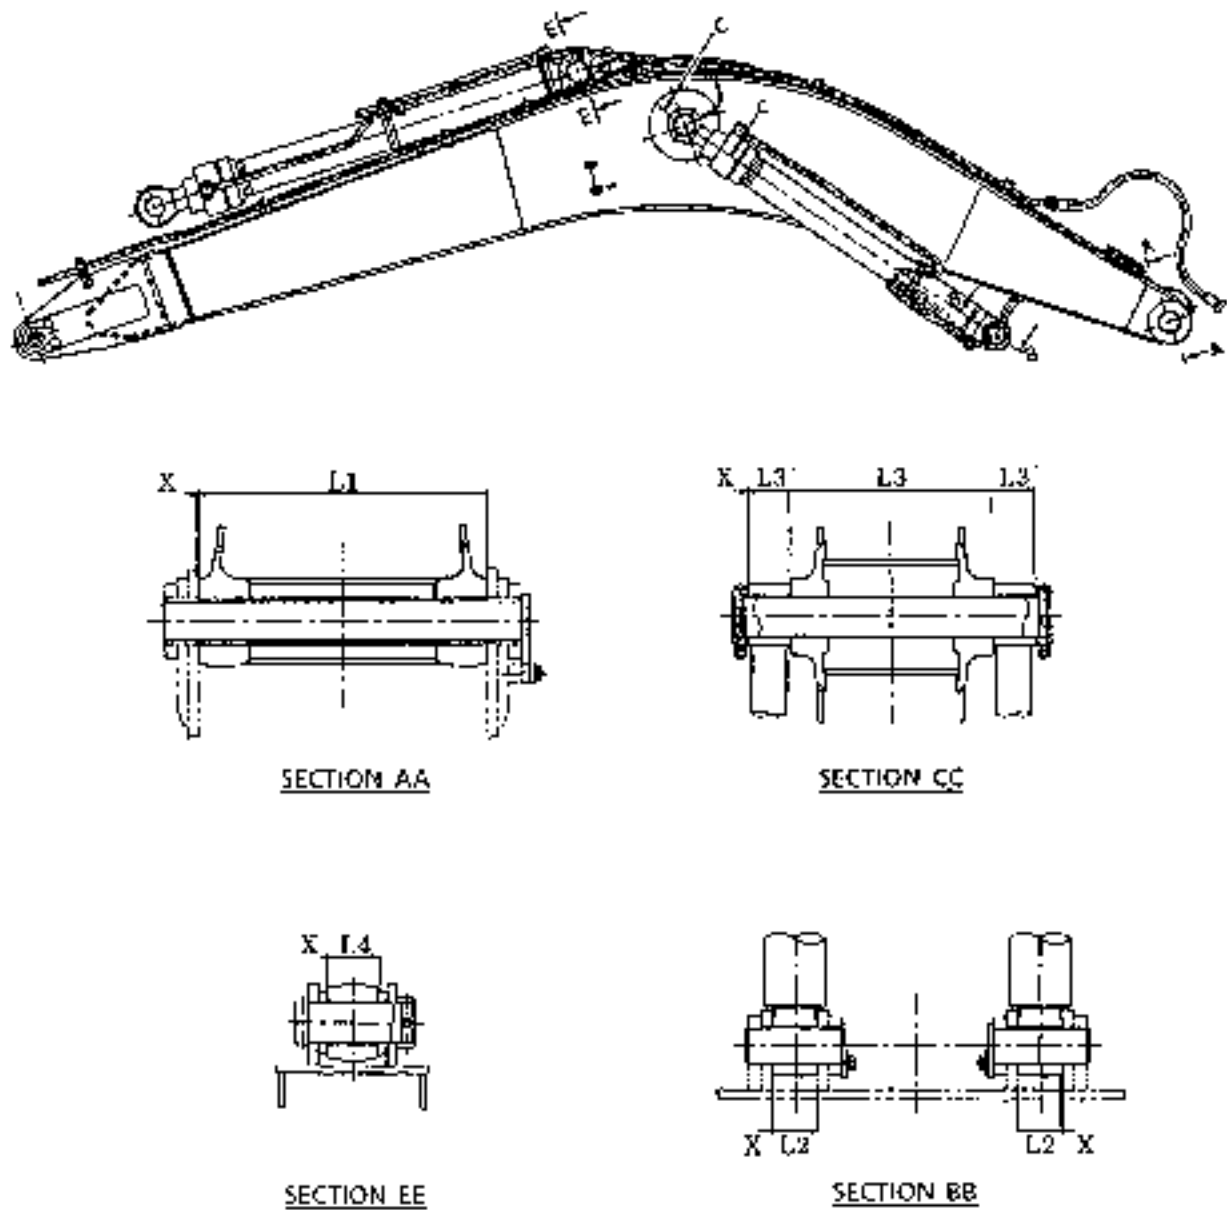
Thrust-wise clearance between boom and cylinder mounting
